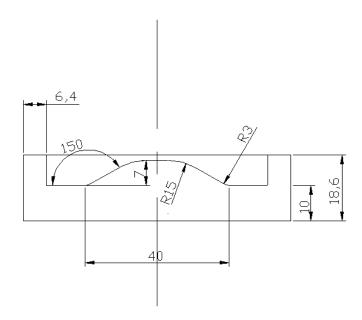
Section through the base-core pattern. All dimensions in millimeters.
